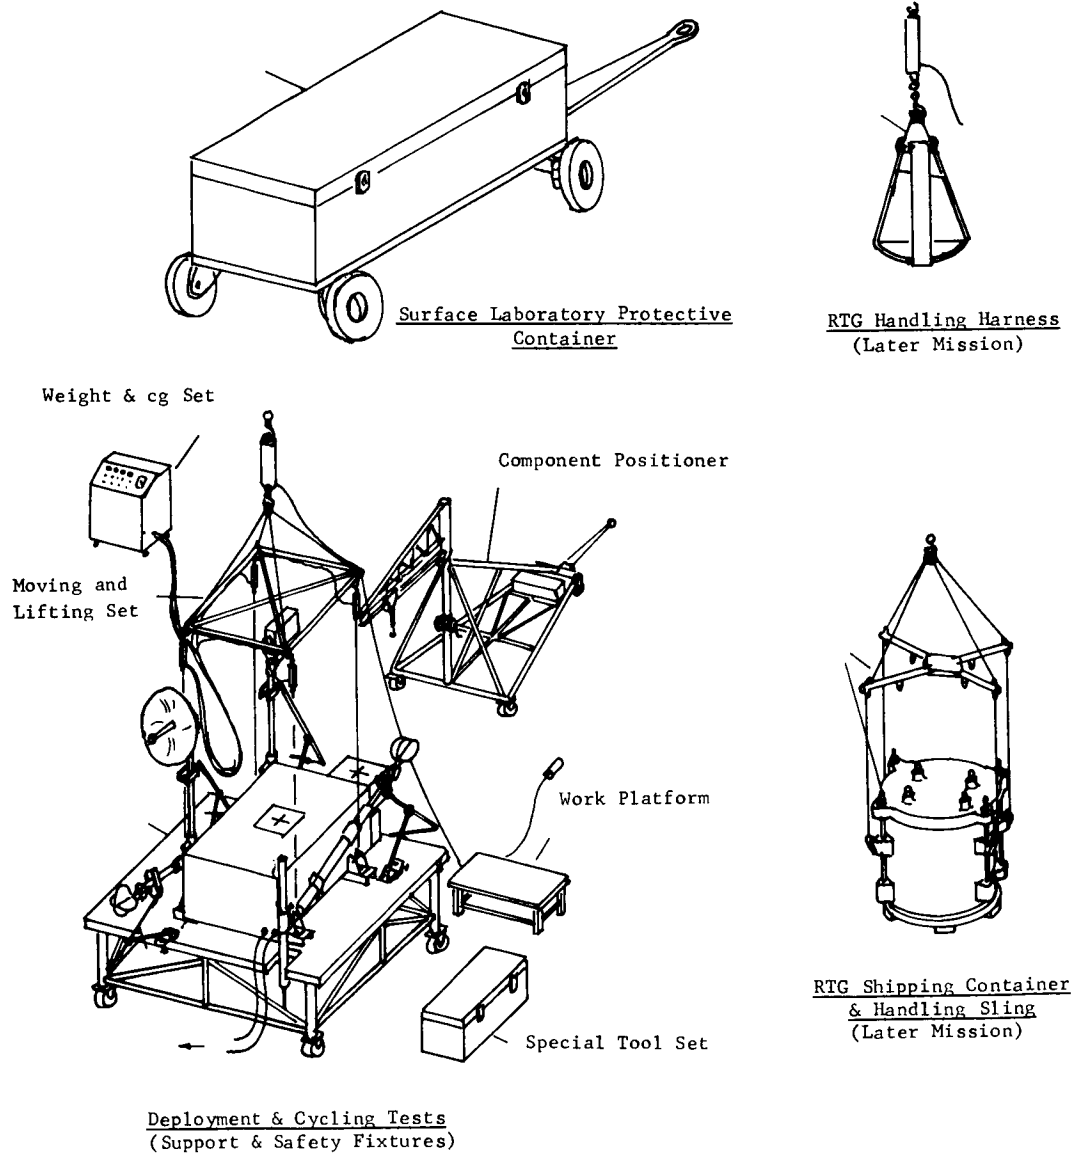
Surface Laboratory Assembly, Handling & Shipping Equipment Use
